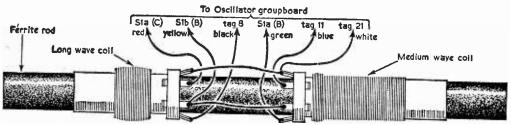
The connections to the coils on the ferrite rod aerial assembly.
